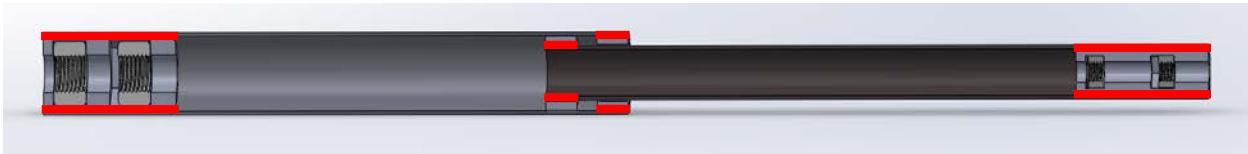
Section View of Telescoping System. Red indicates epoxied pieces.
